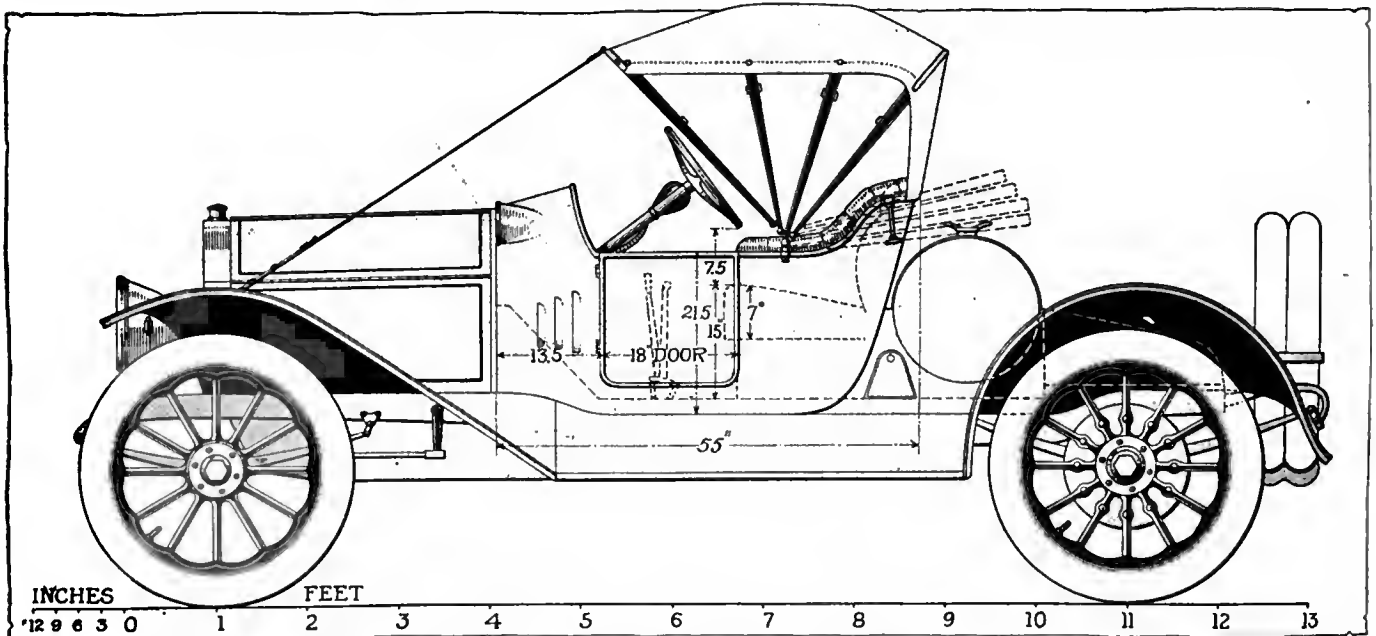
Side elevation to scale of suggested runabout body with doors, adapted to chassis of Pathfinder 40
